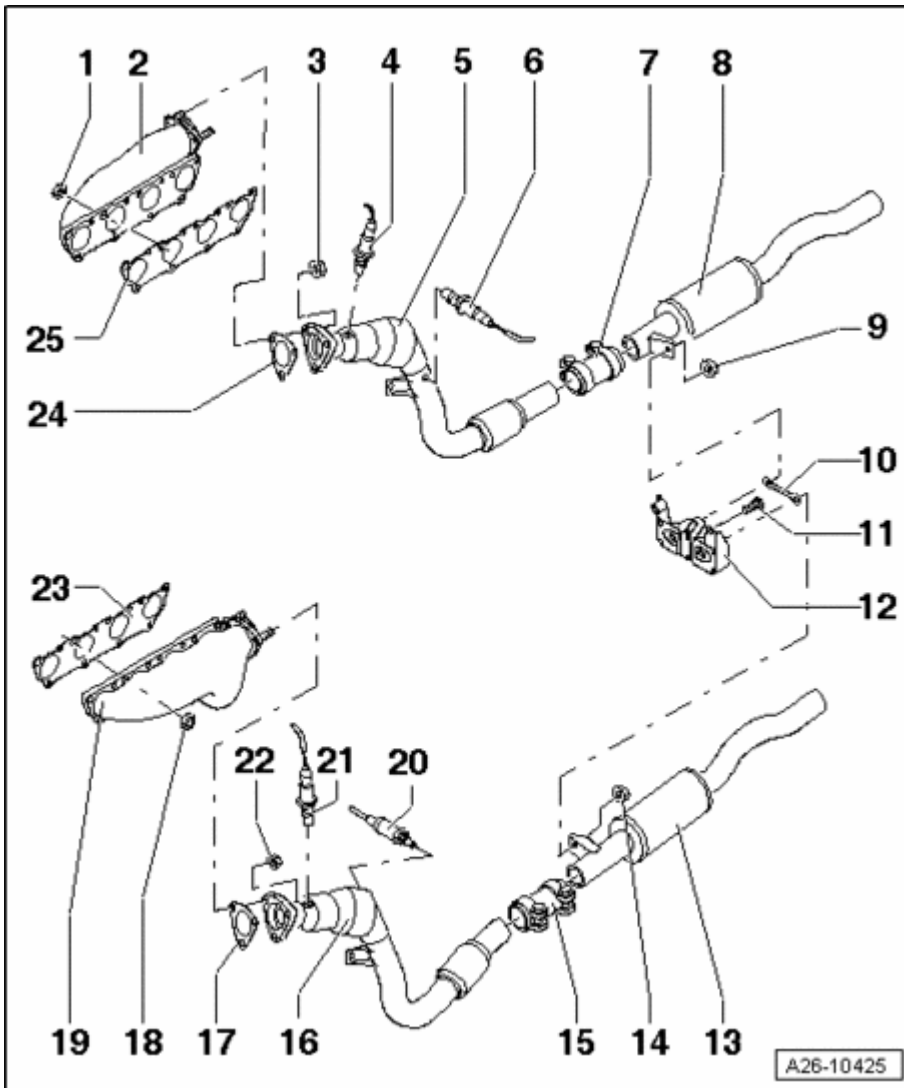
Exhaust System, Assembly Overview (Front Exhaust System)
